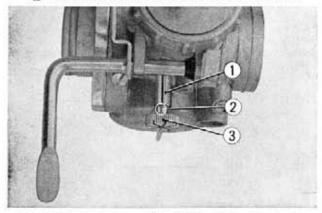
① Index mark ③ Throttle stop screw ② "T" mark
